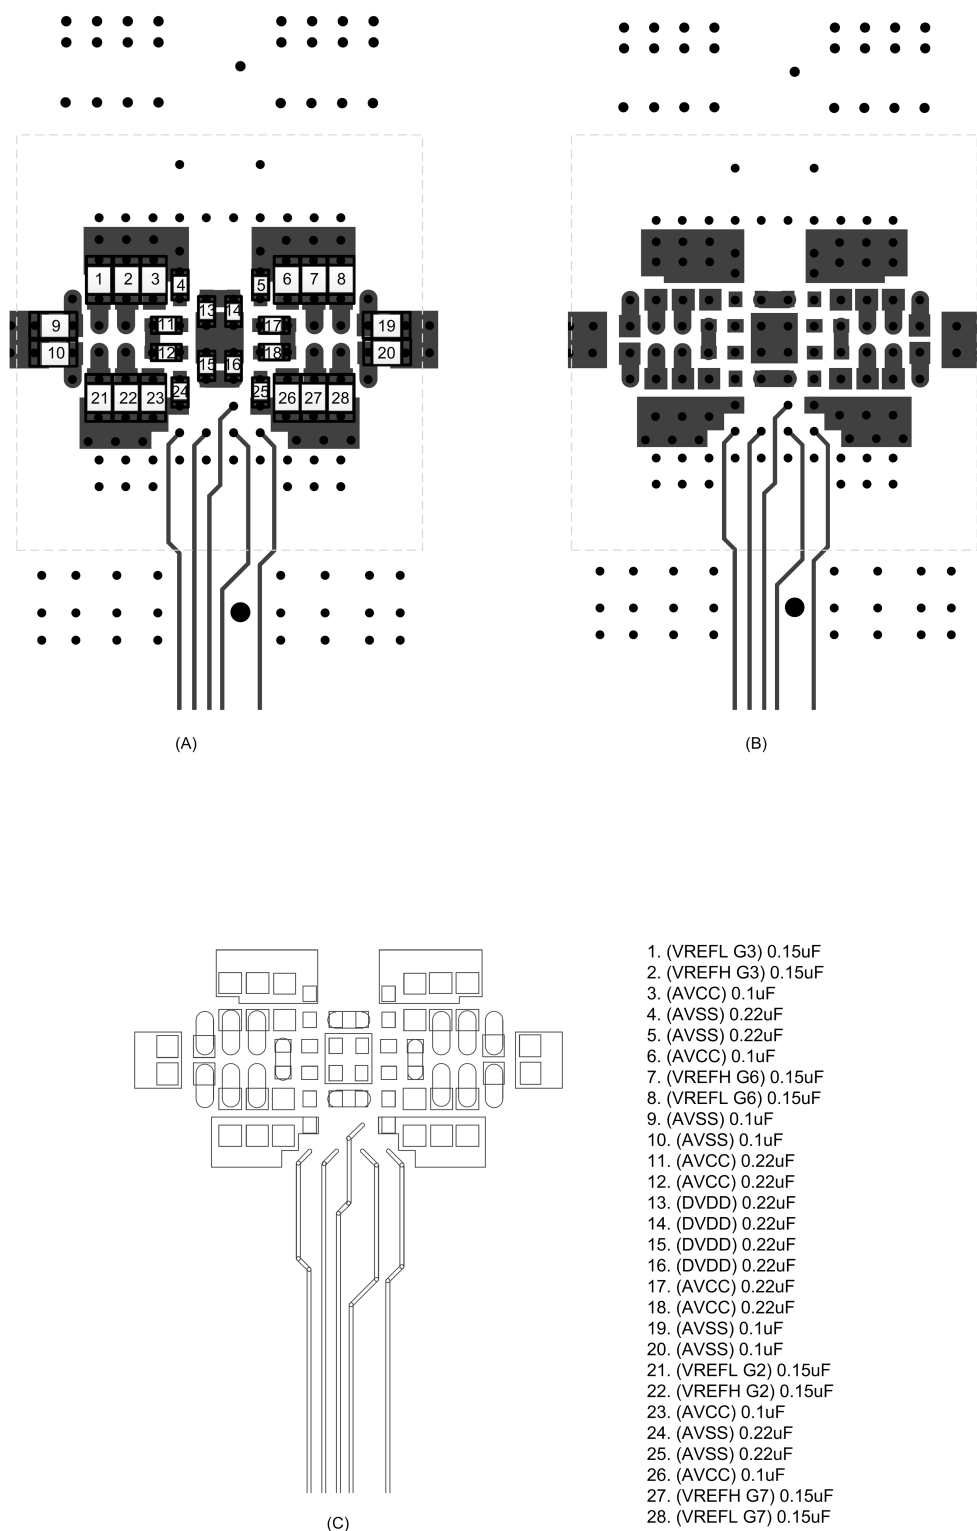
DAC60096 Example Board Layout – Bottom Layer PCB.
